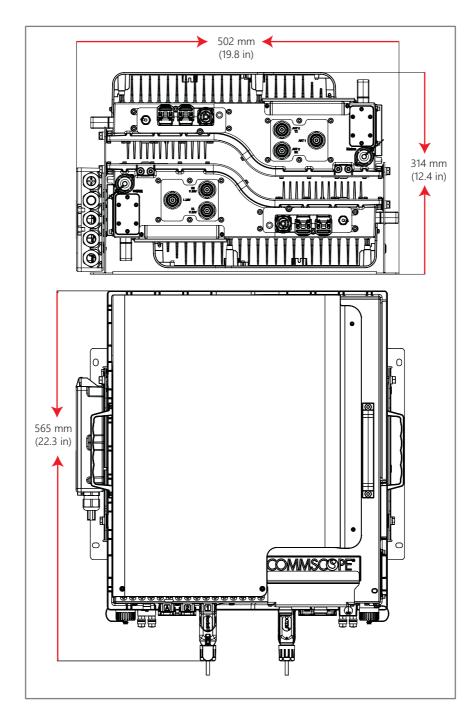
Mounting Dimensions with the Dual Mounting Bracket
